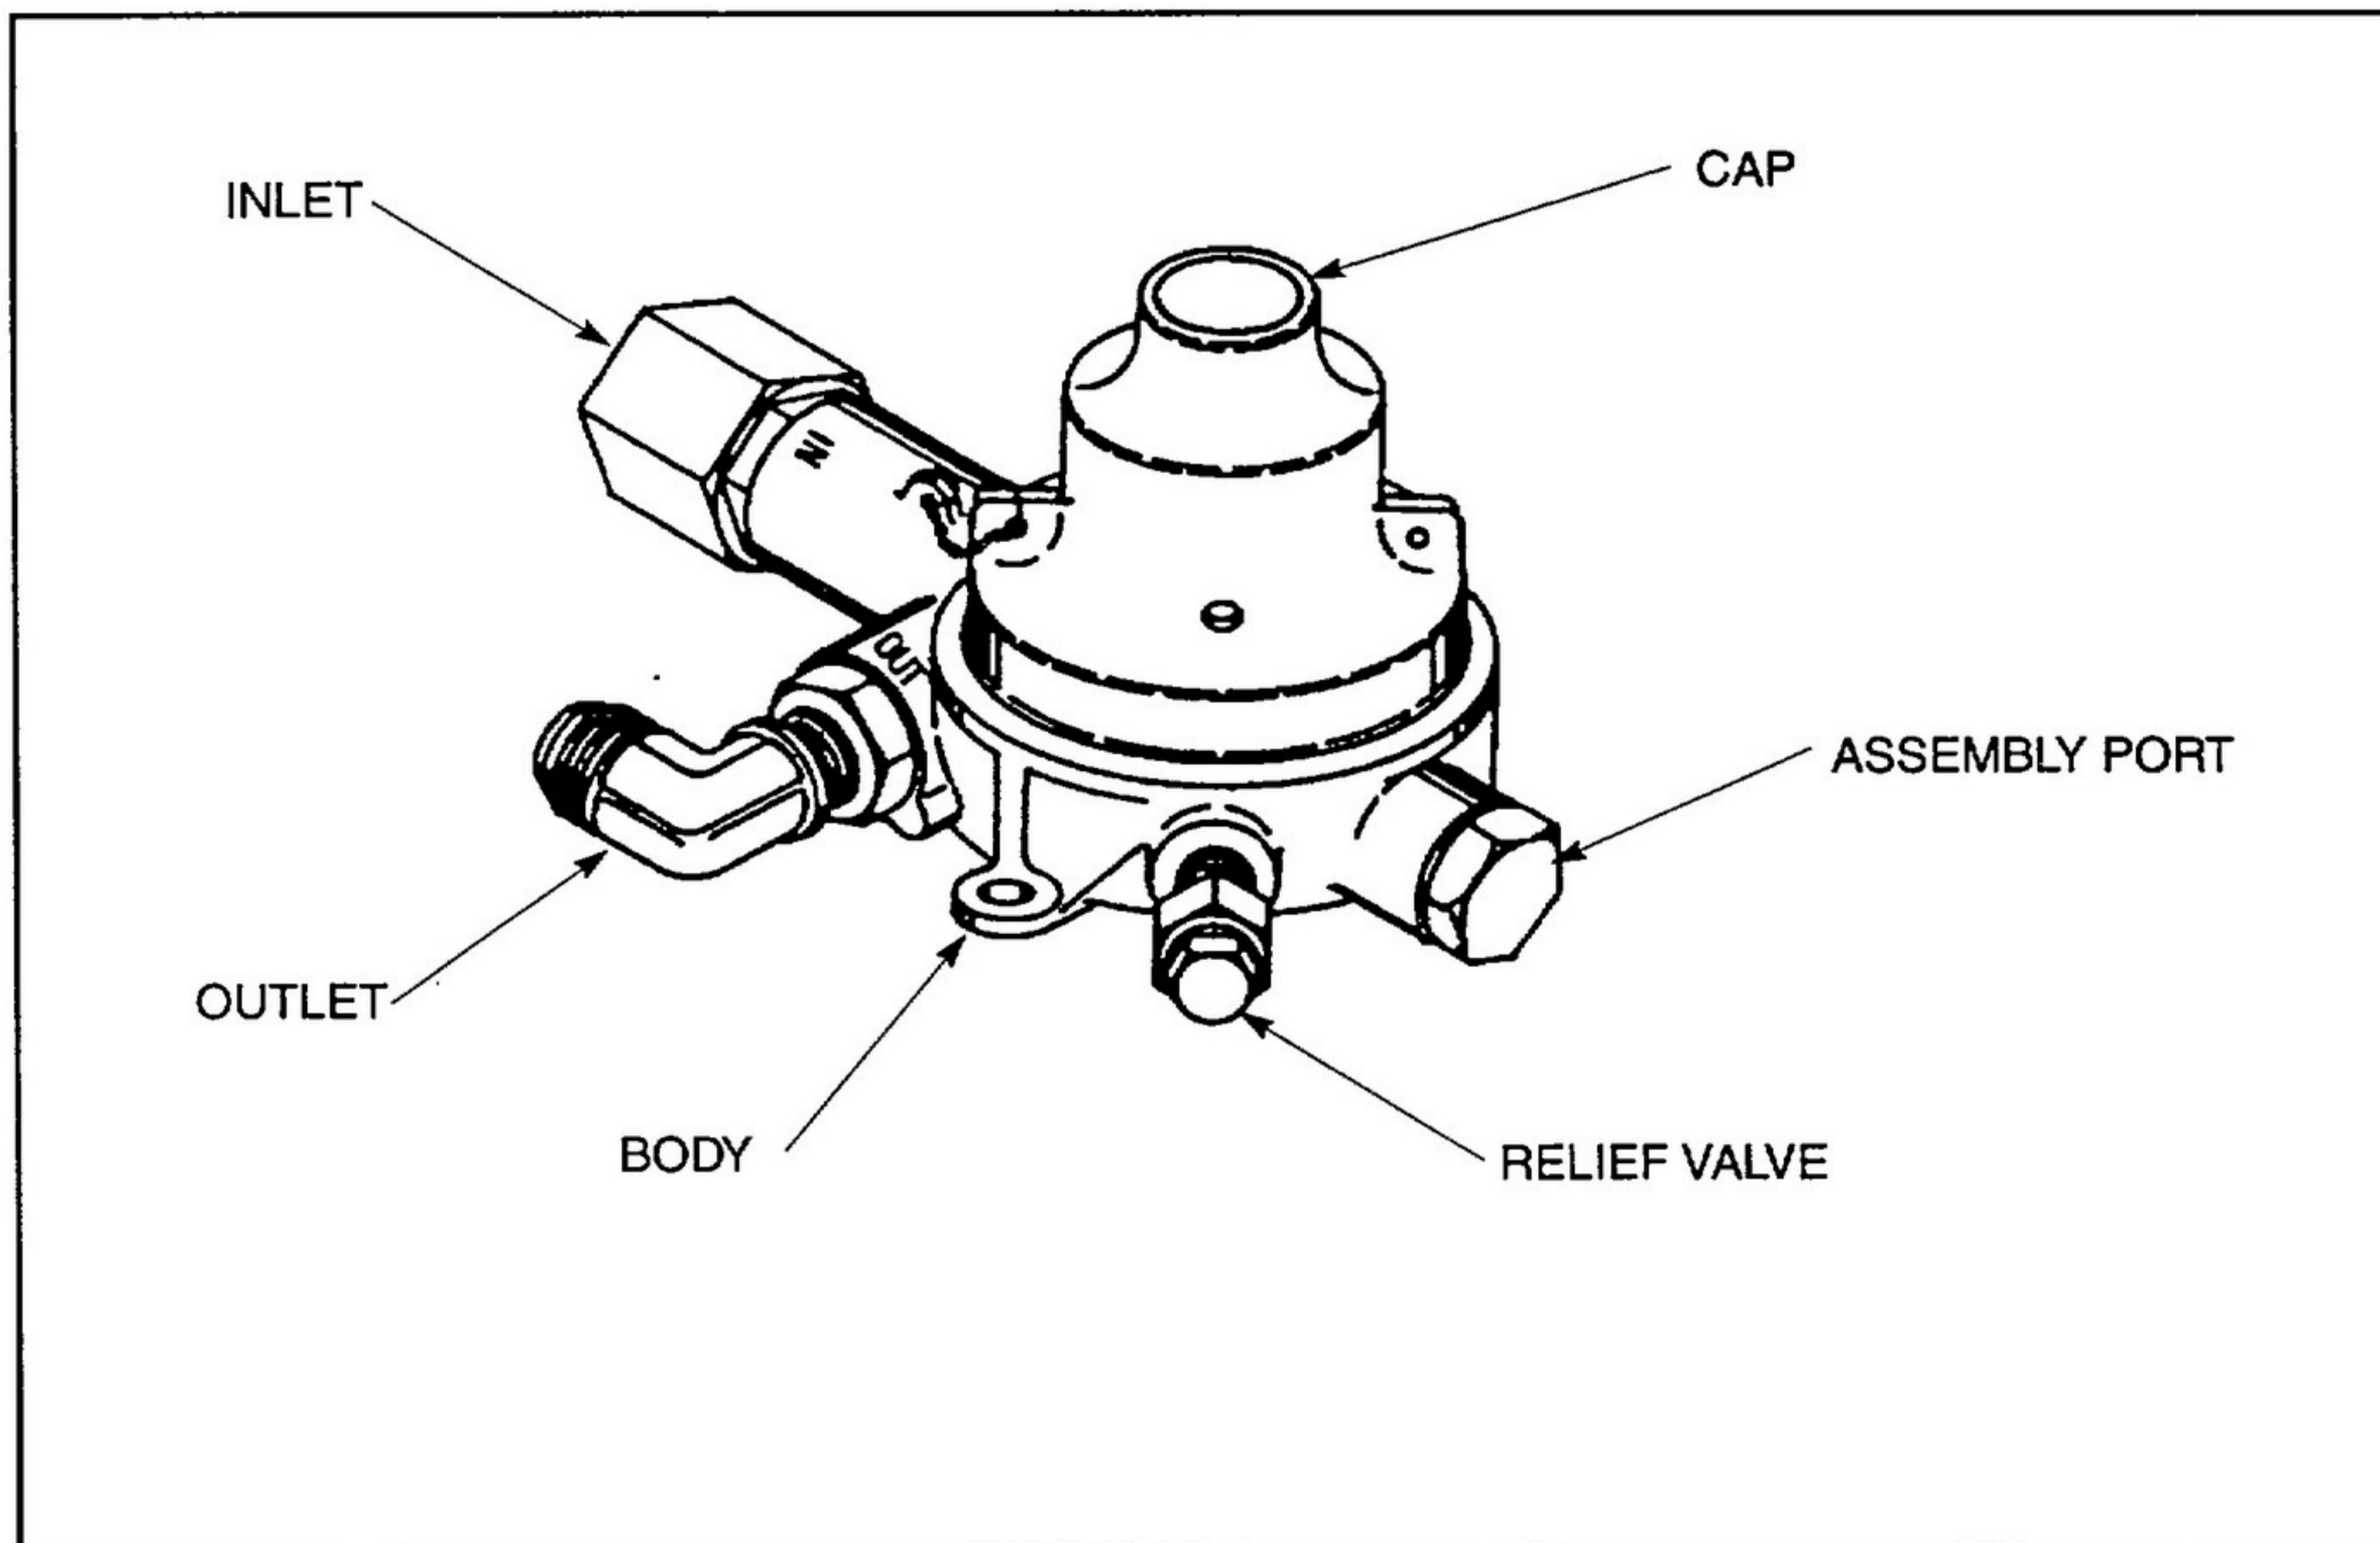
Oxygen Regulator Assembly (27660 -5/-05 shown)
